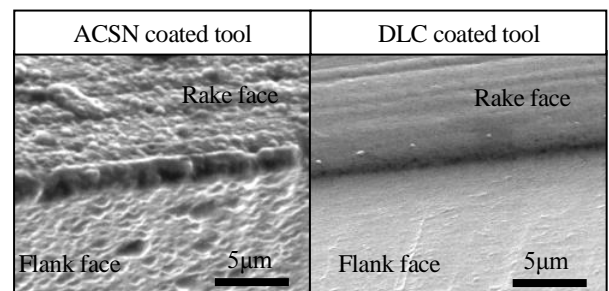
Comparison of machined surface with ACSN coated tool and DLC coated tool on cutting length 25m.
